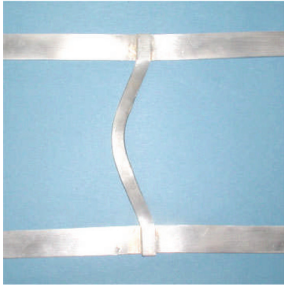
Permanent deformation of a welded steel specimen.
